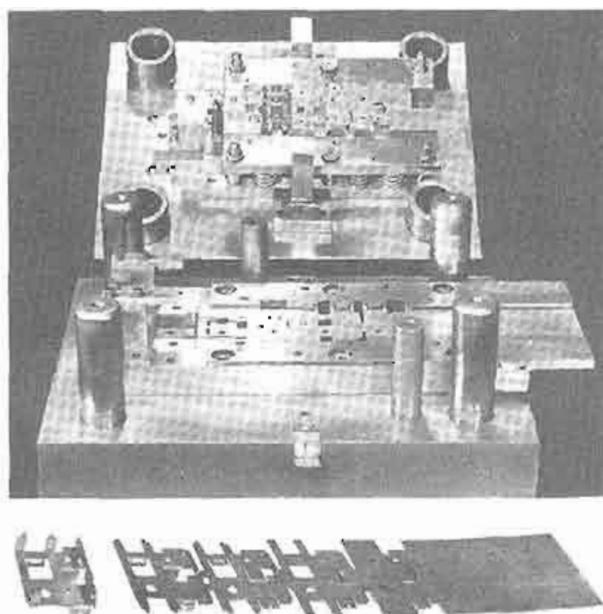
A progressive piercing, forming, and cutoff die set built up mostly from standard components. The part produced is shown at the bottom. (Courtesy of Oak Manufacturing Company, Los Angeles, CA.)
